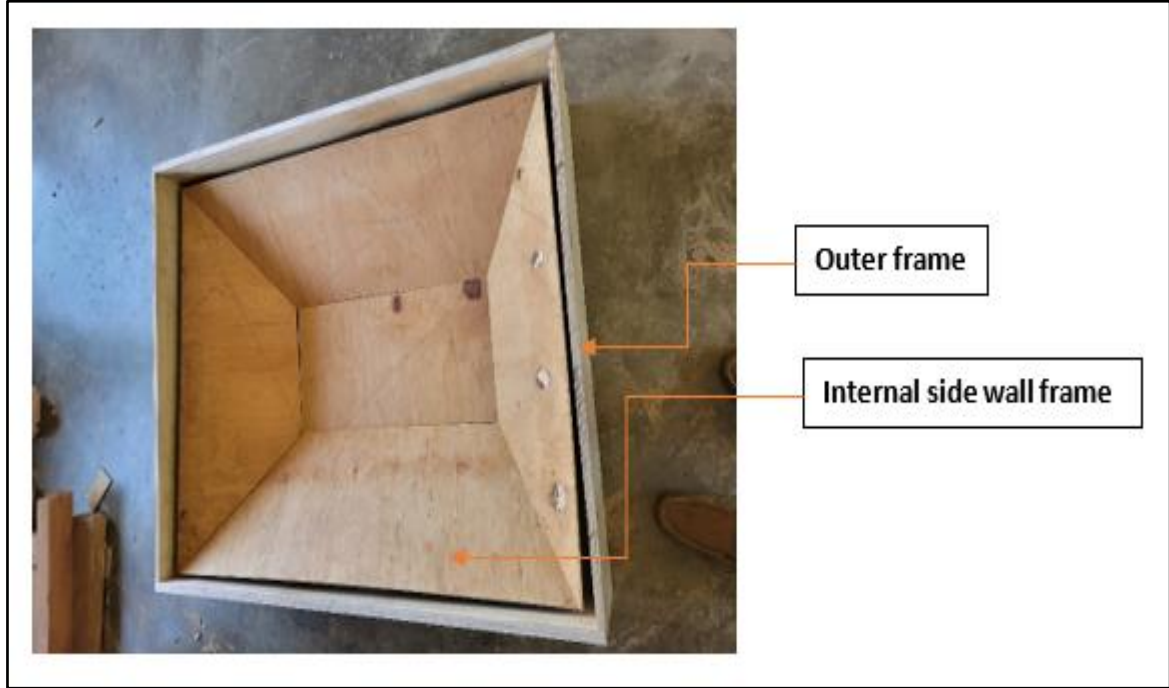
Assembly of the outer frame and internal side wall frame of the DBSC
